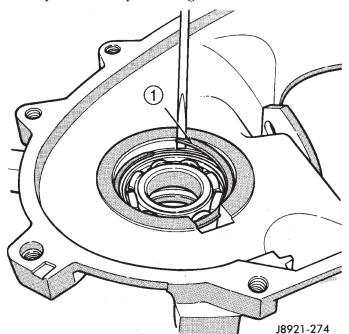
Front Output Shaft Front Bearing Snap-Ring Removal
